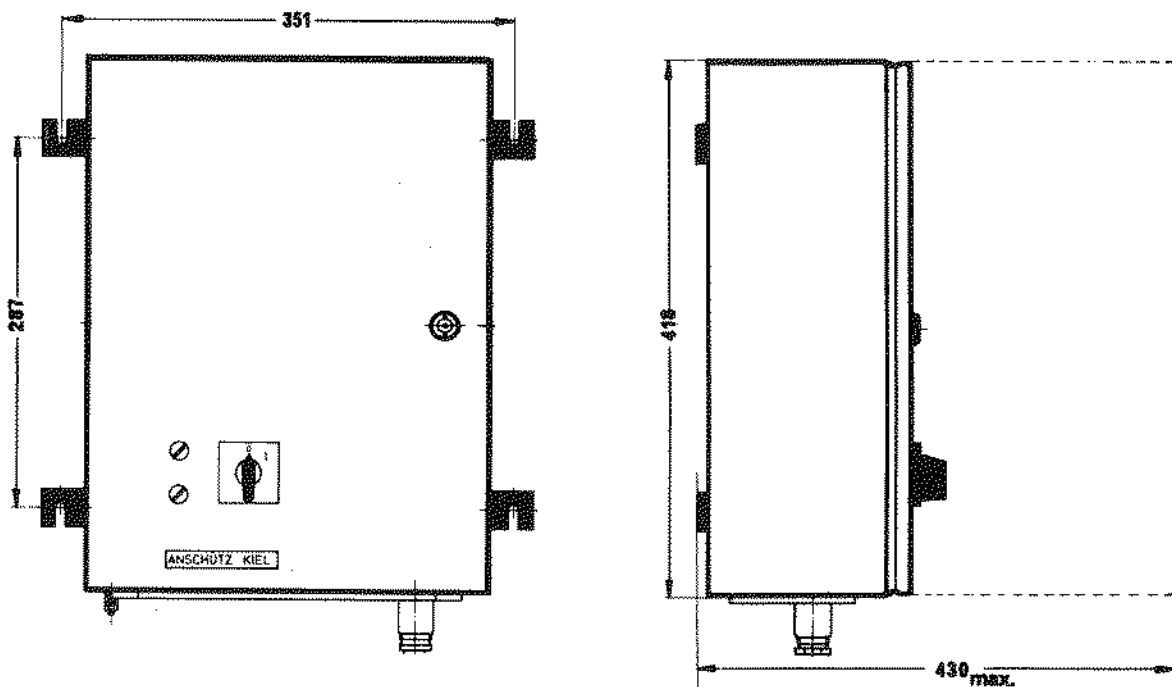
Marking the Fastening Points of the Inverter and/or of the Course Transducer
